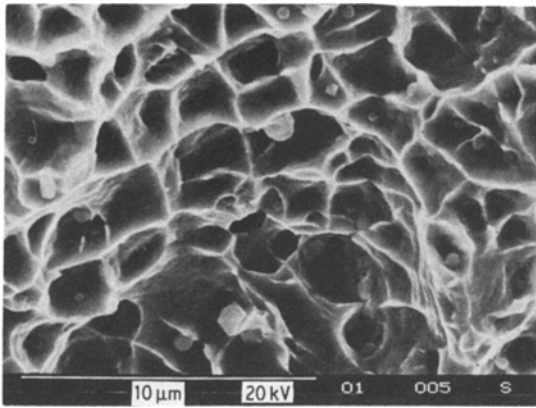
Ductile fracture surface of the as-welded material showing microvoid initiation at weld metal inclusions.
